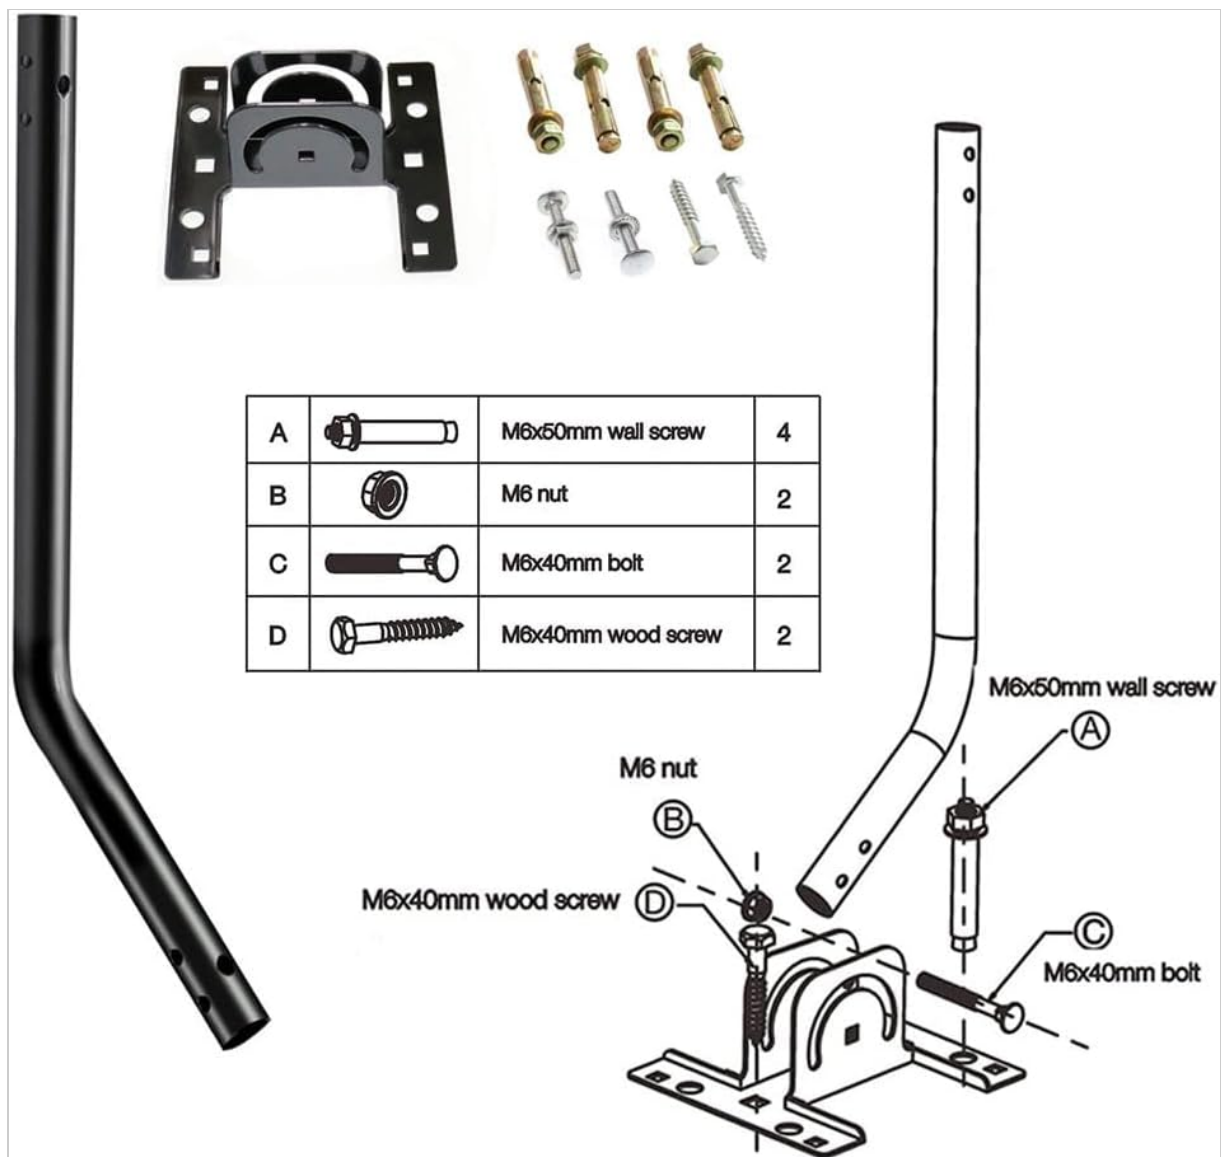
Mounting Hardware Diagram. This image details the individual mounting components (wall screws, nuts, bolts, wood screws) and provides an exploded view of how the J-mount pole attaches to the bracket.
